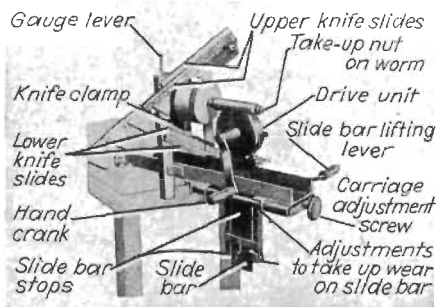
Knife grinder that can be operated with hand or foot power, electric motor, or gas engine.
